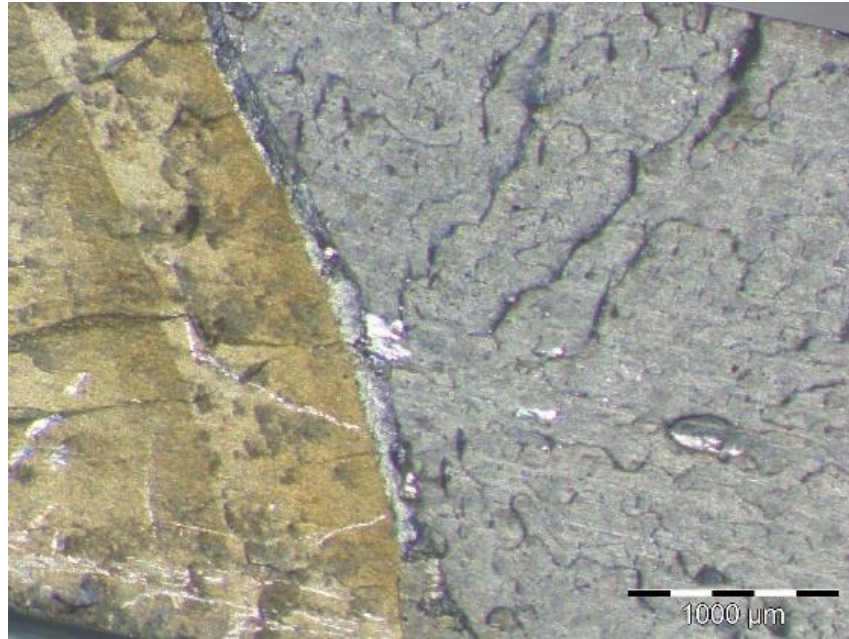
Stereo microscope image of crack surface after fracture testing for test temperature 250°C.
